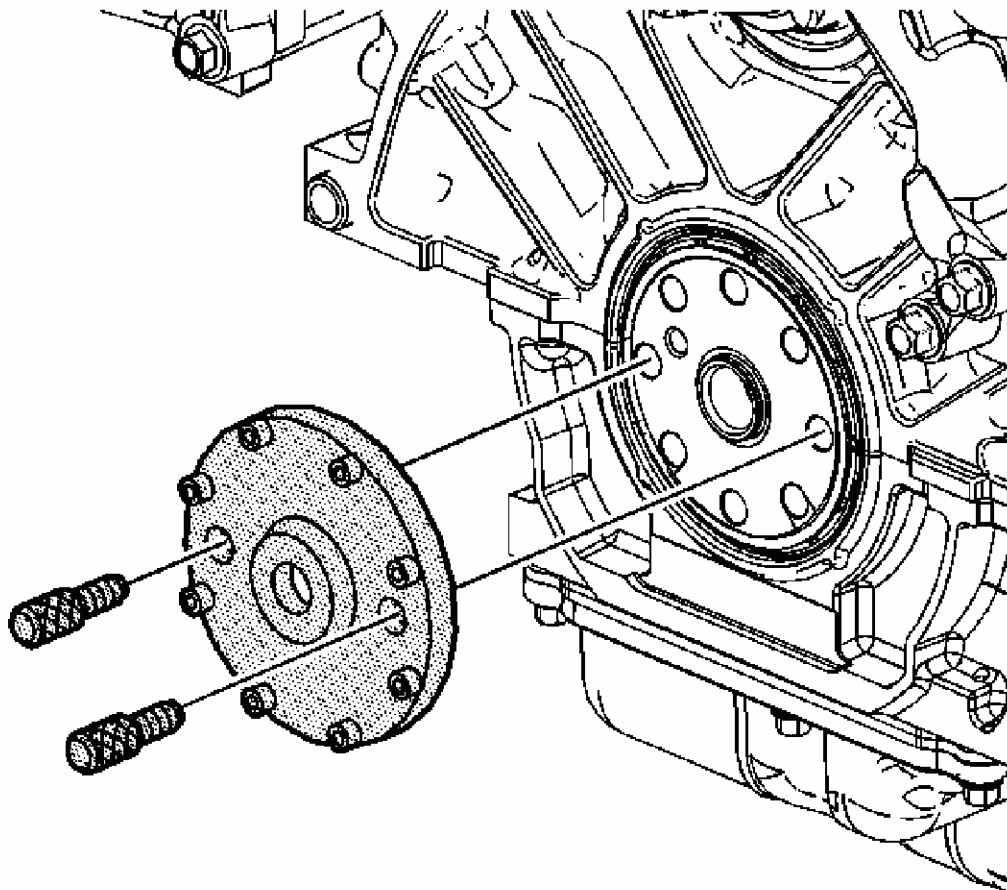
View Of J 42841 Removing Rear Crankshaft Oil Seal
